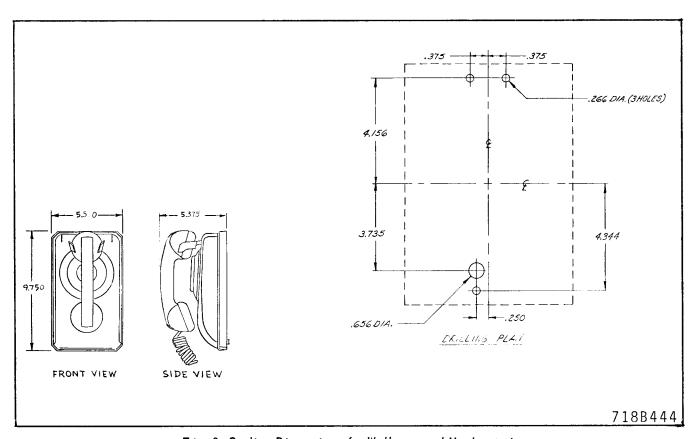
Outline Dimensions for Wall mounted Hookswitch
